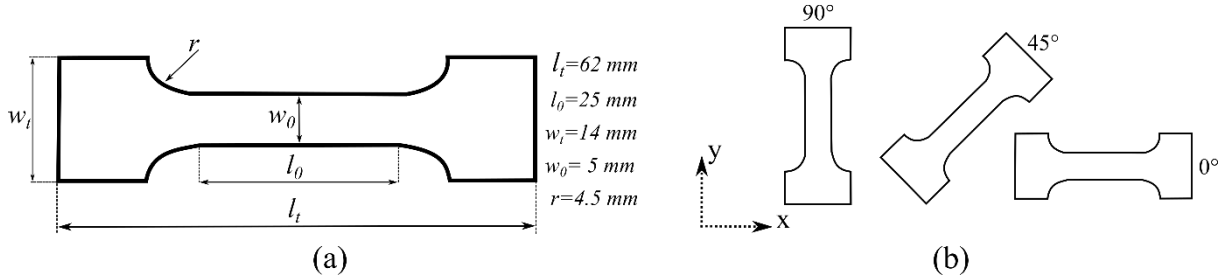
Tensile test specimen (a) Geometry and characteristic dimensions (in mm), (b) direction tests.
